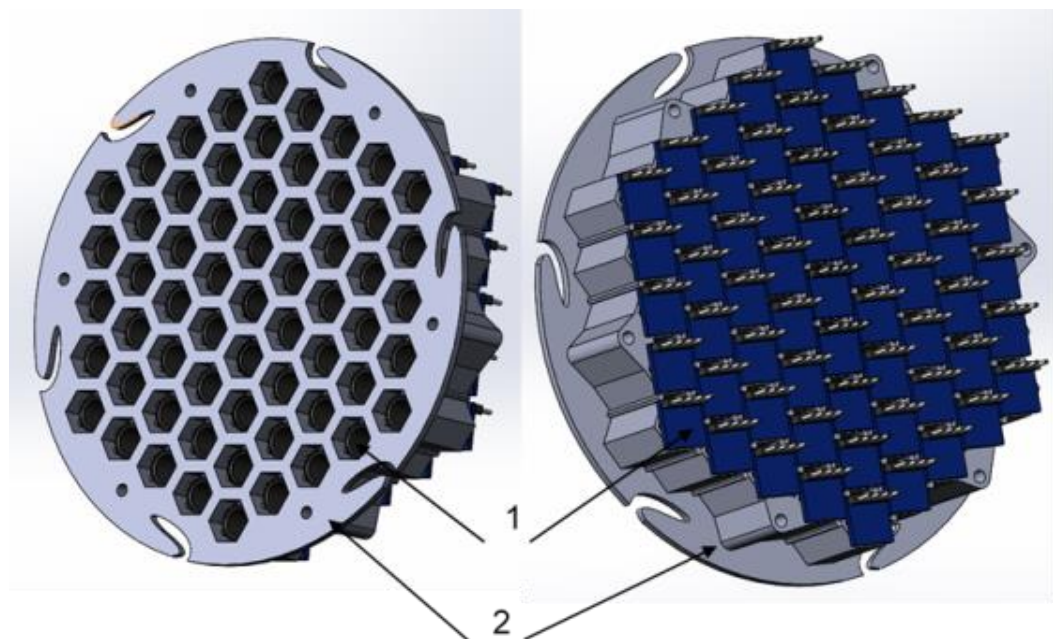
External view of the sensor unit: 1 - MLX90614ESF-DCI sensors; 2 - casing.
